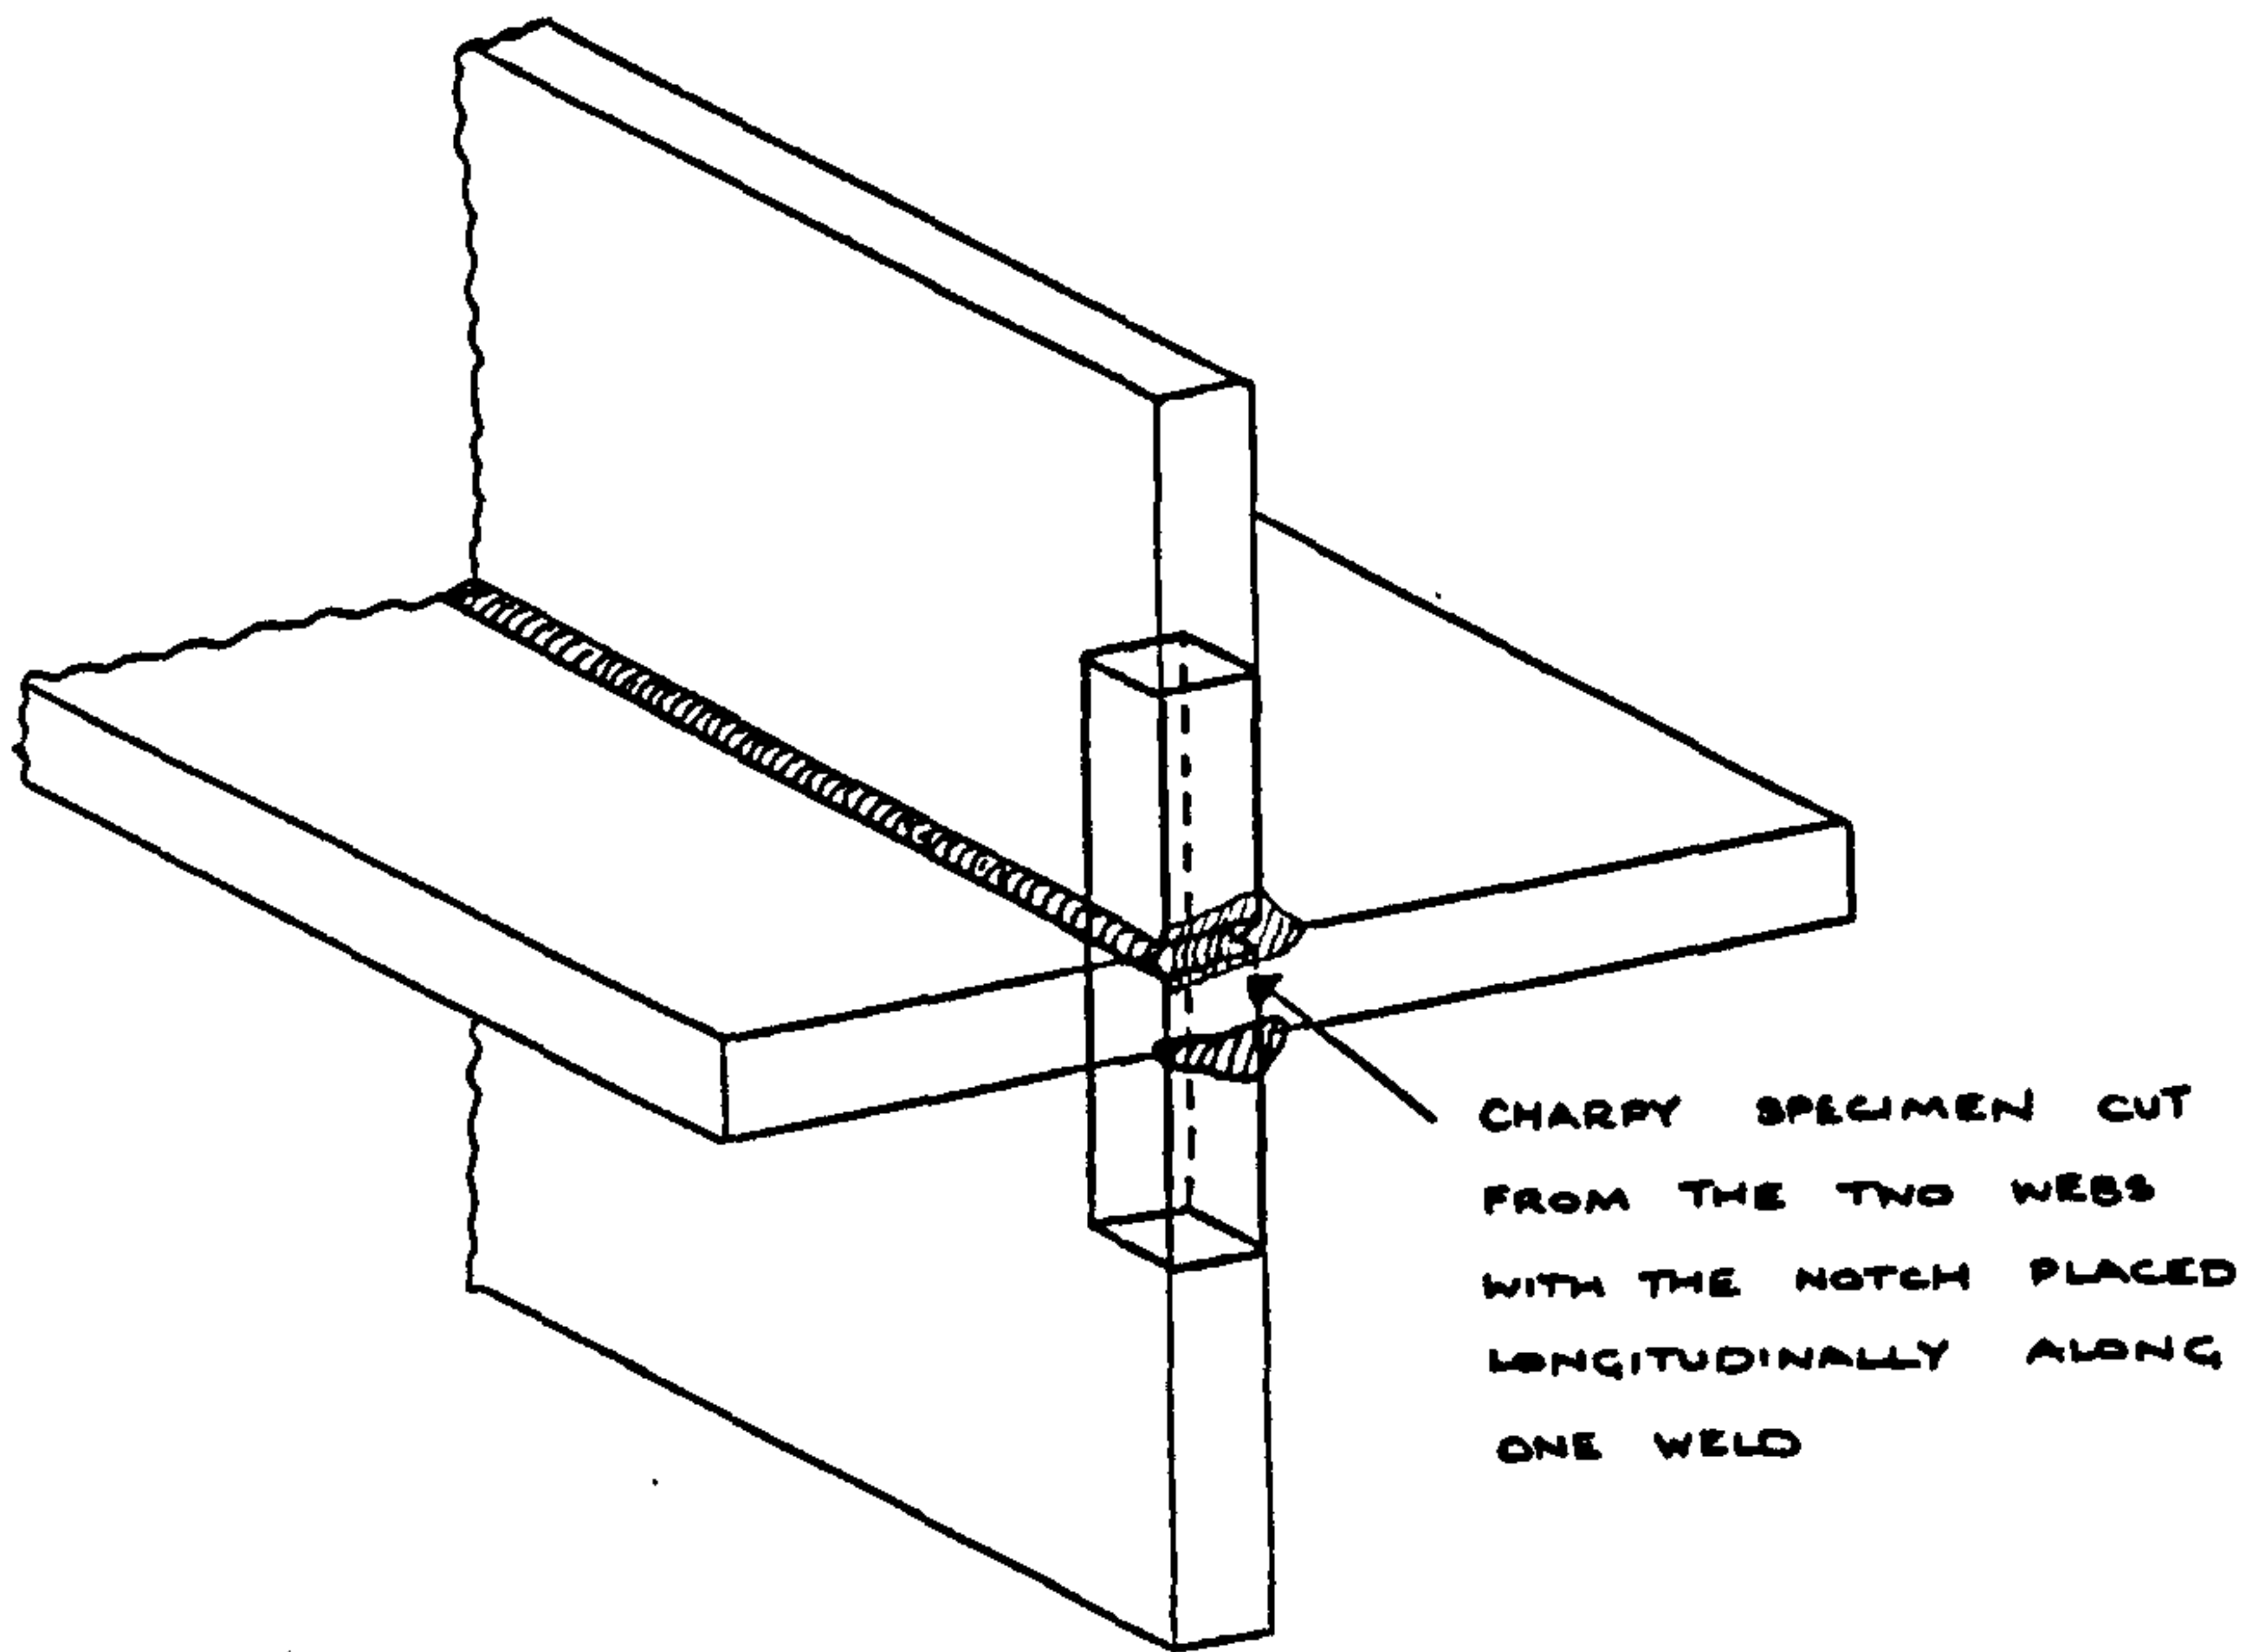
Charpy test specimen extraction from a cruciform welded sample
